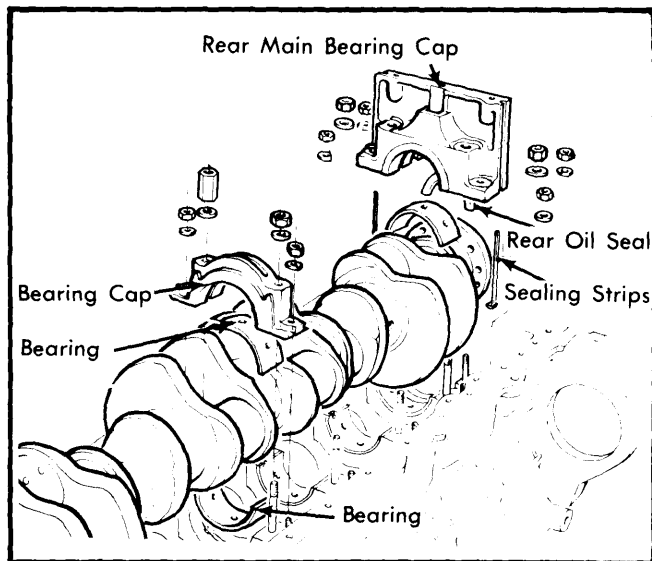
Exploded View of Main Bearing & Rear Oil Seal Assemblies
